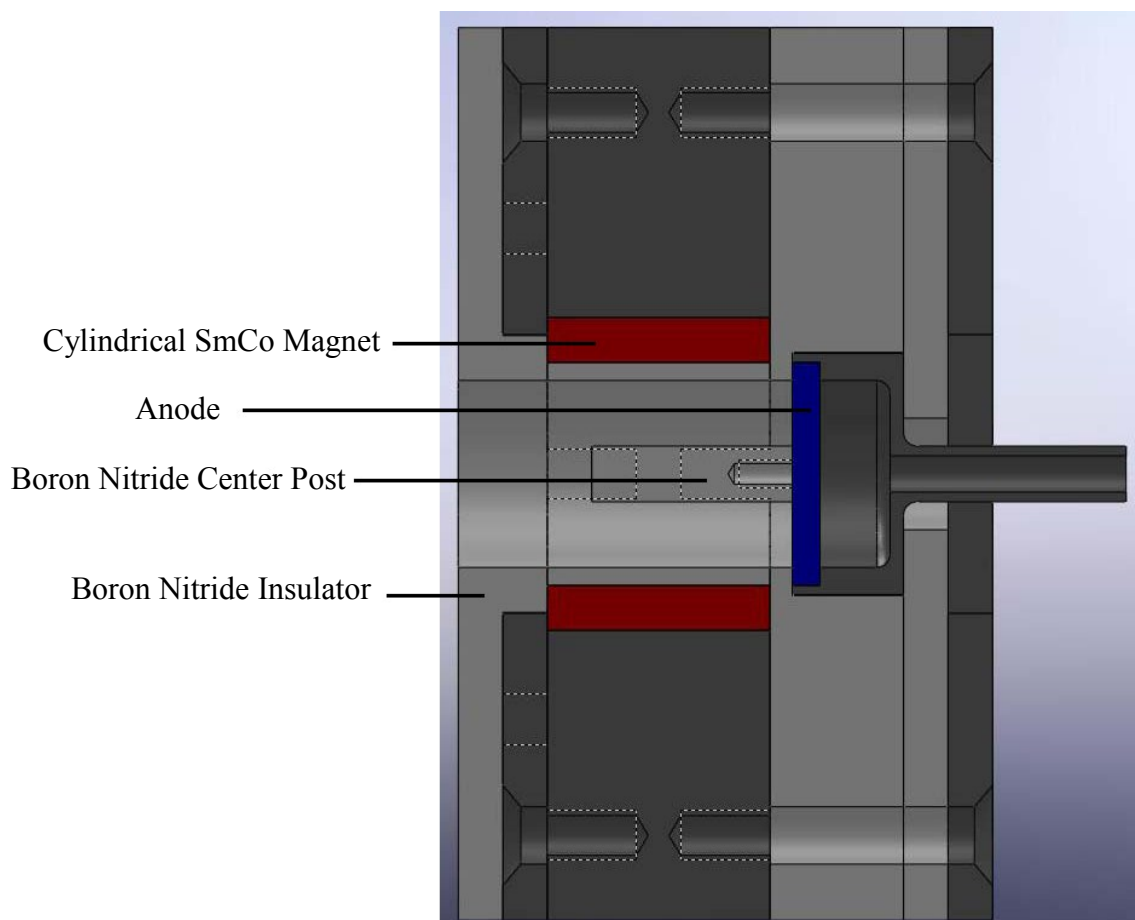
Cross-sectional diagram of BHT-20 thruster illustrating key components, taken from Paintal [3].
